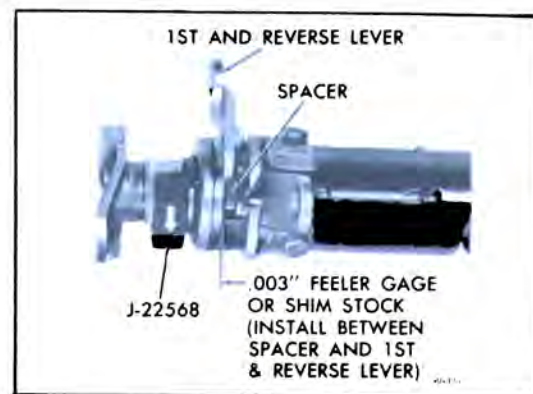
Adjusting Shift Lever Lash at Lower End of Steering Column
